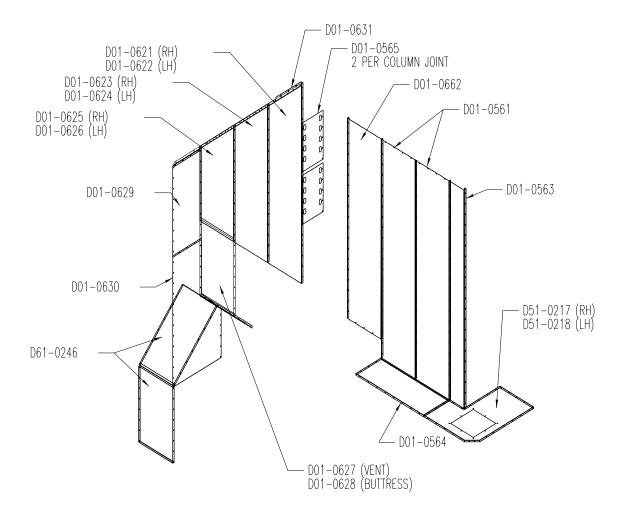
2018 and 2020 Inside Side Duct Assembly
